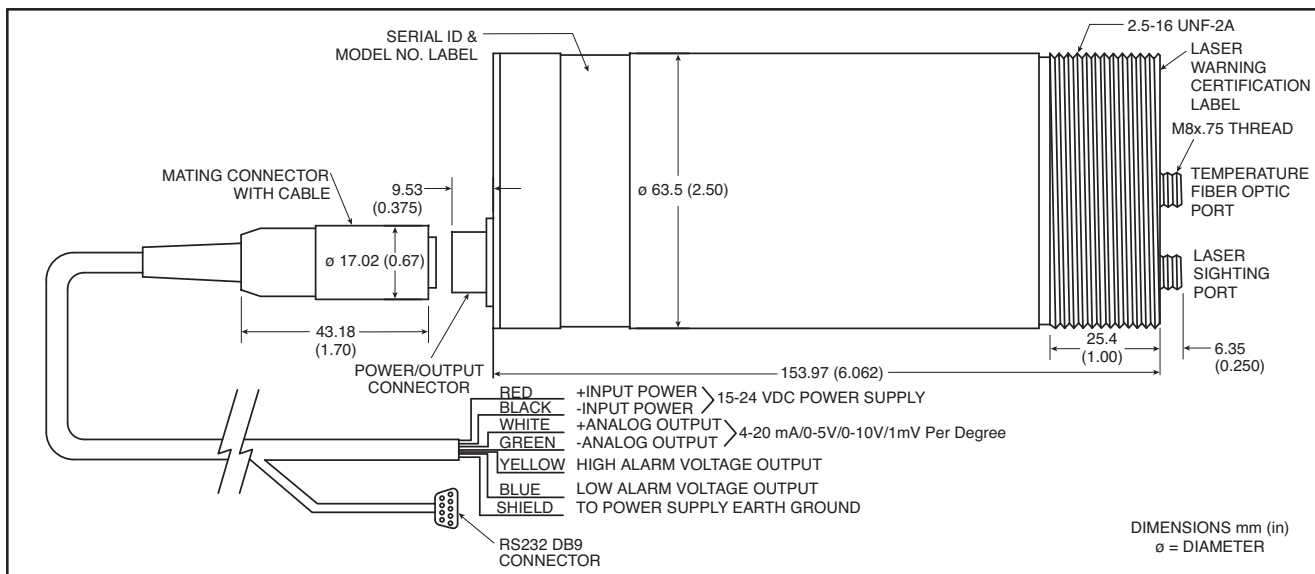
General Dimensions, Wiring Connections for the Transmitter
